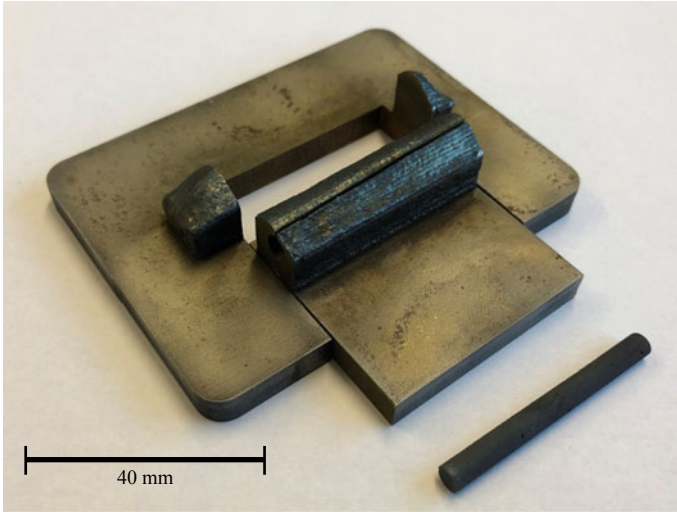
Additive manufactured sample with eroded dilatometer specimen
